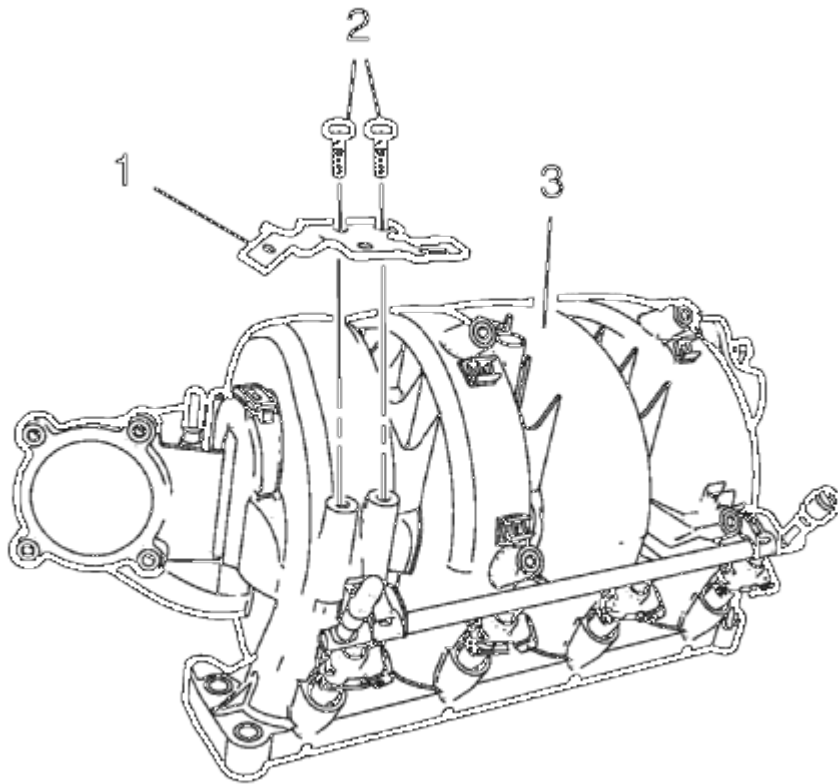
Intake Manifold, Evaporative Emission Canister Purge Solenoid Valve Bracket And Bolts
